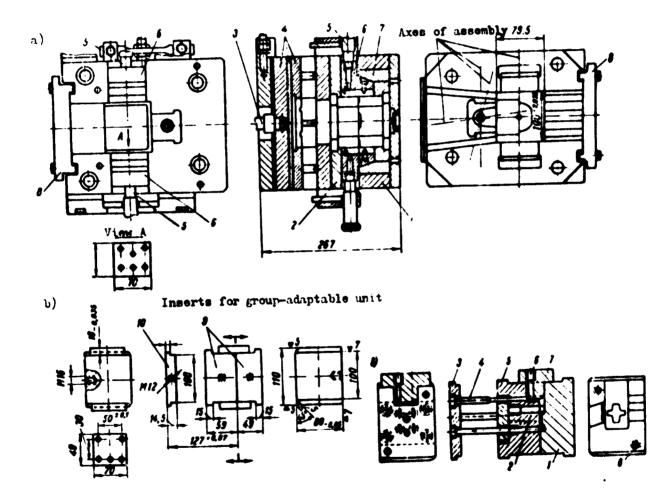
shows the design of the mould inserts. The inserts consist of a fixed would 1 with guide posts 5, a movable would 5 with cores 6 and 7 which are connected with the movable block 6 of the mould assembly (Figure 34a), and a punch 4 and ejector 4 mounted on a plate 3.
